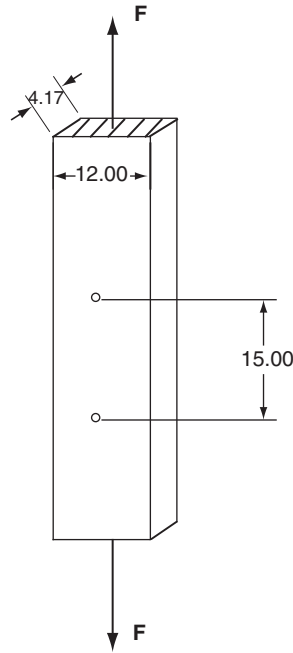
Bone plate used to fix bone fractures, with applied axial load. Dimensions are in mm. *Adapted from [2].
